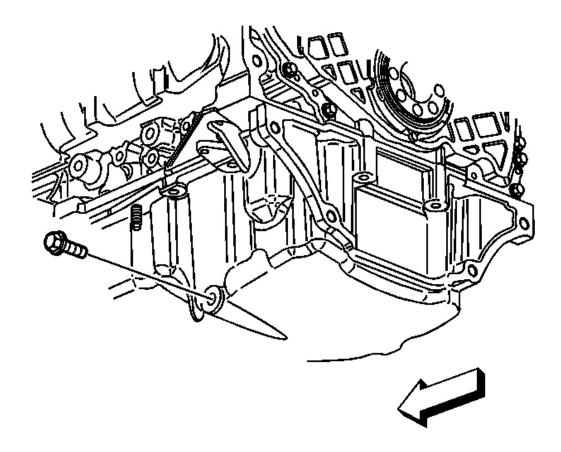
View Of Oil Pan Drain Plug Courtesy of GENERAL MOTORS CORP.
